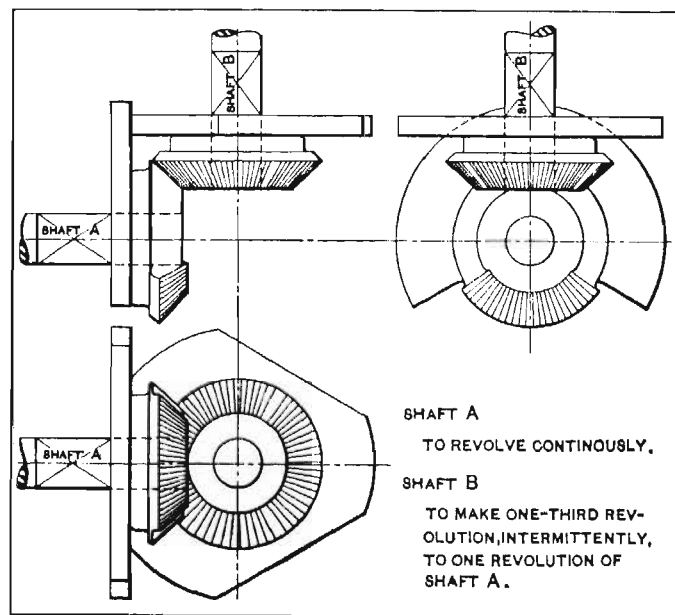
Intermittent Bevel Gears Provided with Auxiliary Locking Device
